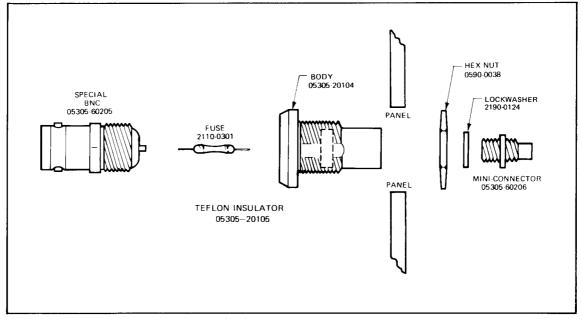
Details of Input Connector J1 and Fuse Mounting
